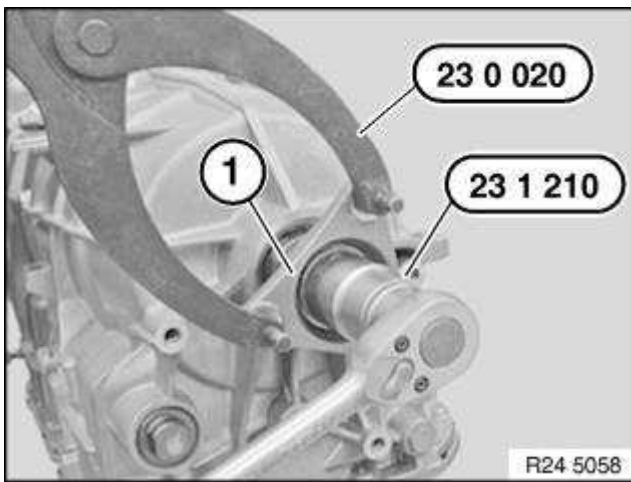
Grip Output Flange (1) With Special Tool 23 0 020
